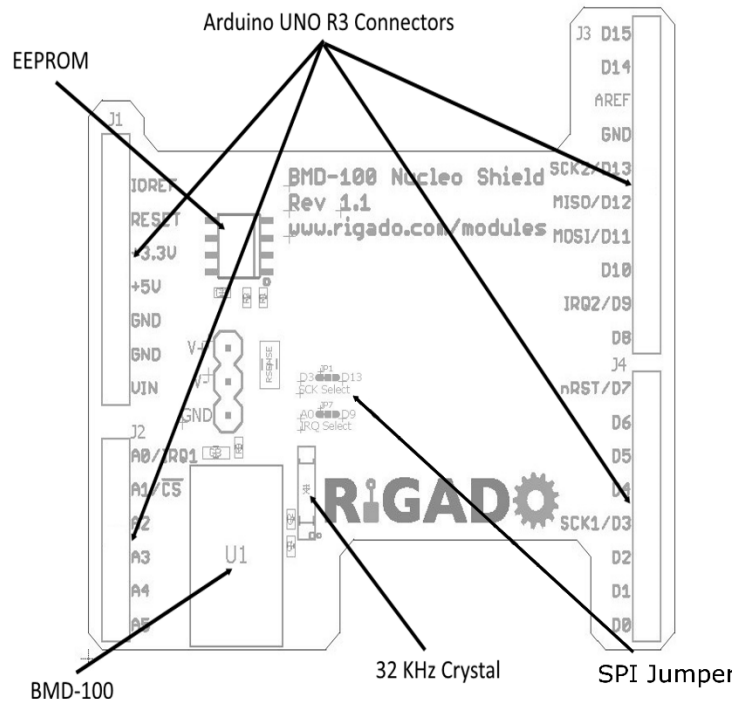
BMD-100 Nucleo Shield Assembly Drawing
